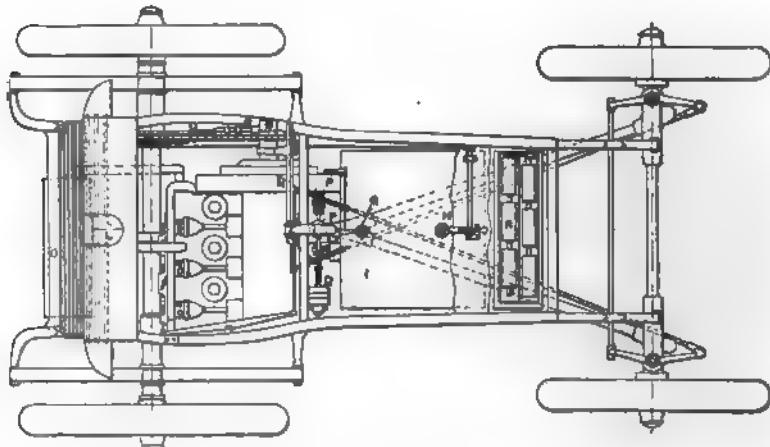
Plan View of Duryea Three-cylinder Car. *B*, bearing for speed gear; *C*, distance-rod from rear axle for taking up the pull of the chain; *D*, the magneto-generator; *G*, pedal for operating the reverse clutch; *H*, brake pedal; *I*, gasoline tank; *P*, central single control lever; *R*, 6-cell battery. Front axle shorter than rear to prevent skidding and promote ease in turning.
